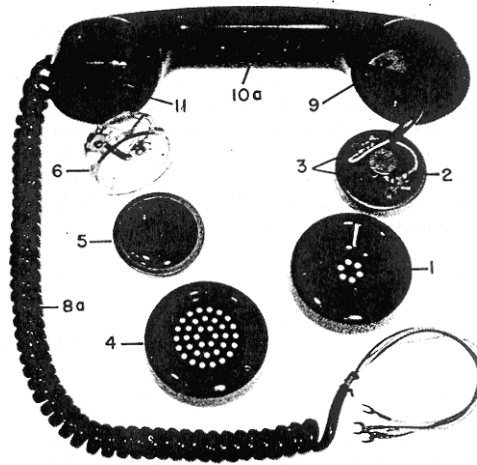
COMPONENT PARTS - EXPLODED VIEW
